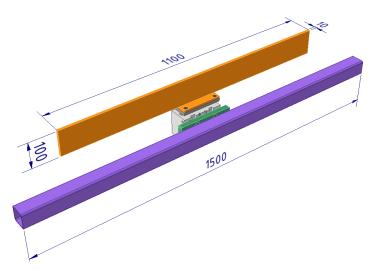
Second roller conveyor of the chain roller conveyor machine that transports pallets. Dimensions in mm.
